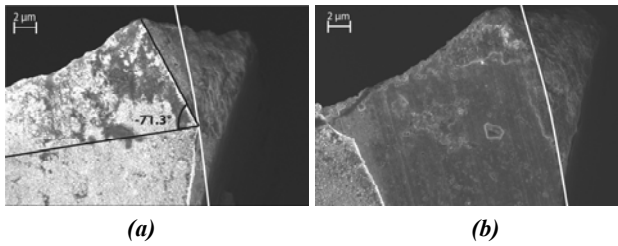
Coated end mill cutting edge that shows: (a) formation of negative rake angle after edge fracture after 100 mm of milling, and (b) wearing of negative rake angle after 150 mm of milling.
